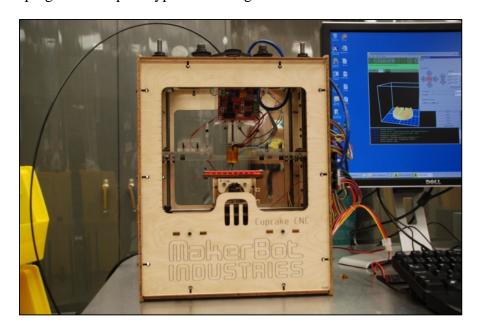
The MakerBot Cupcake CNC Uses GCode Machine Code
